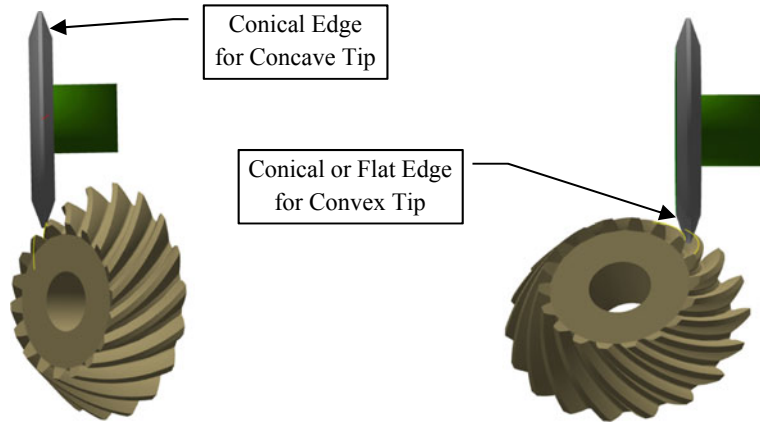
Spiral bevel gear Tip chamfering with a CoSIMT
